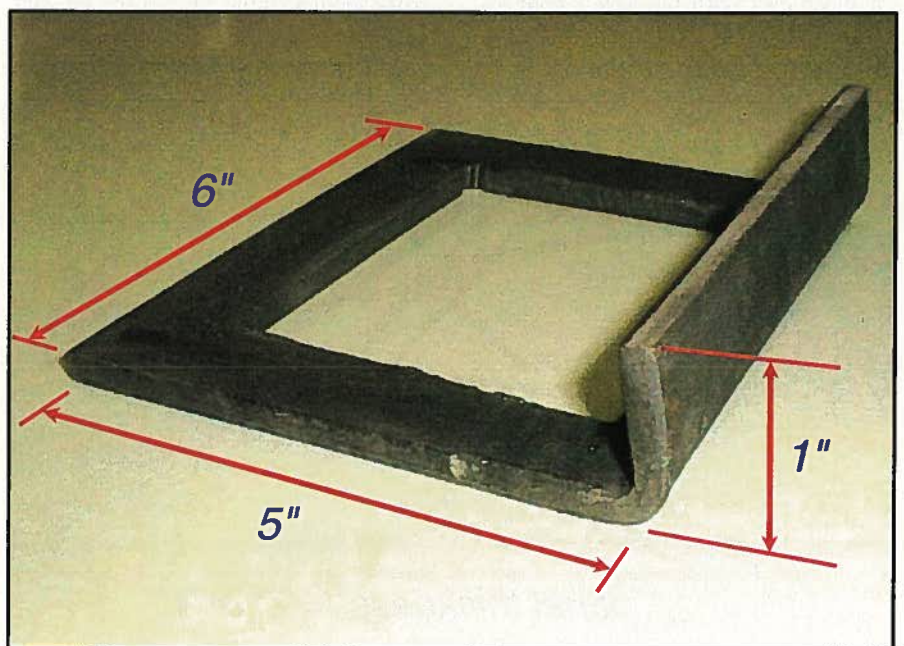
Overall view of bent plate connector. Note: 1 in. = 25.4 mm.
